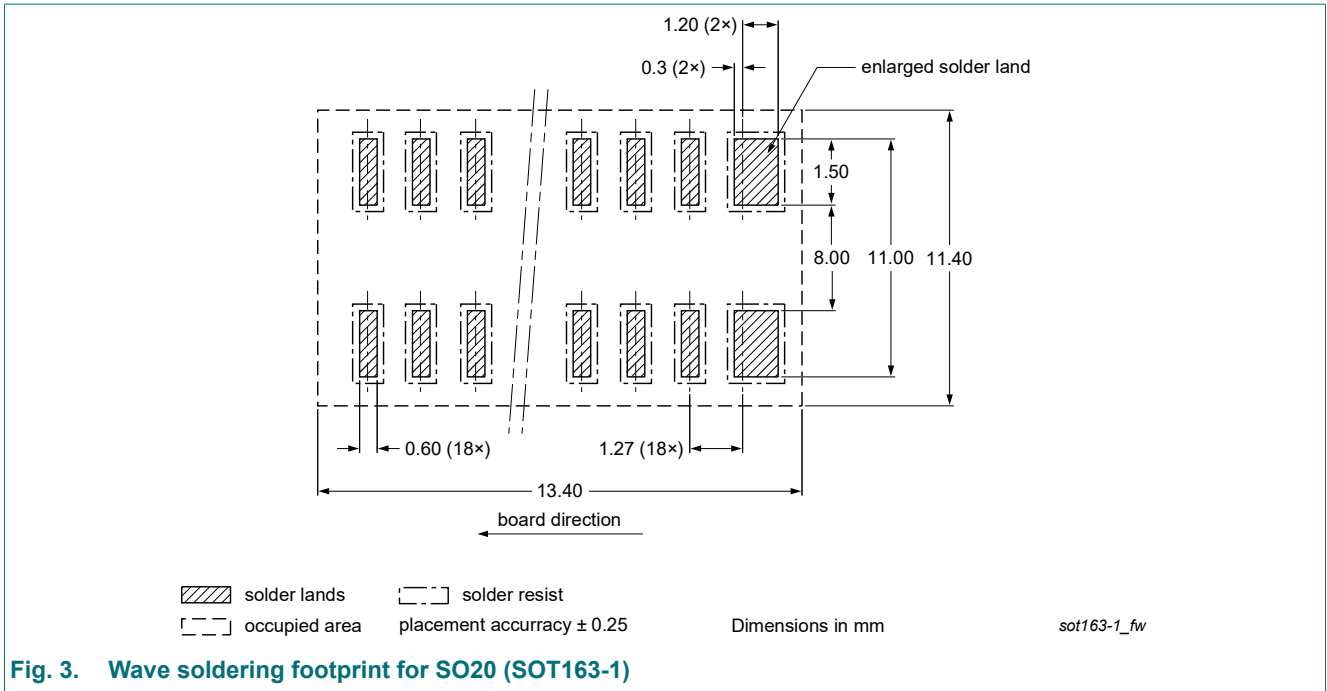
Wave soldering footprint for SO20 (SOT163-1)
